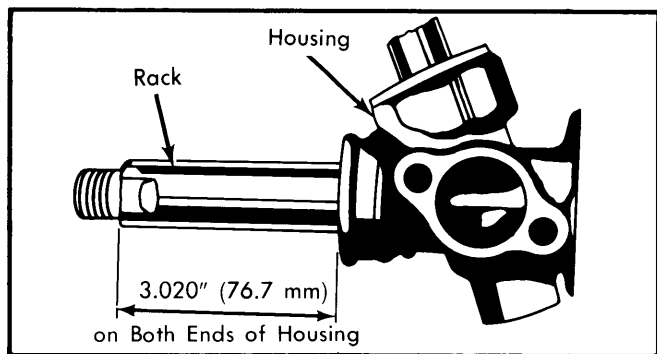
View Showing Method of Centering Rack in Gear Housing
